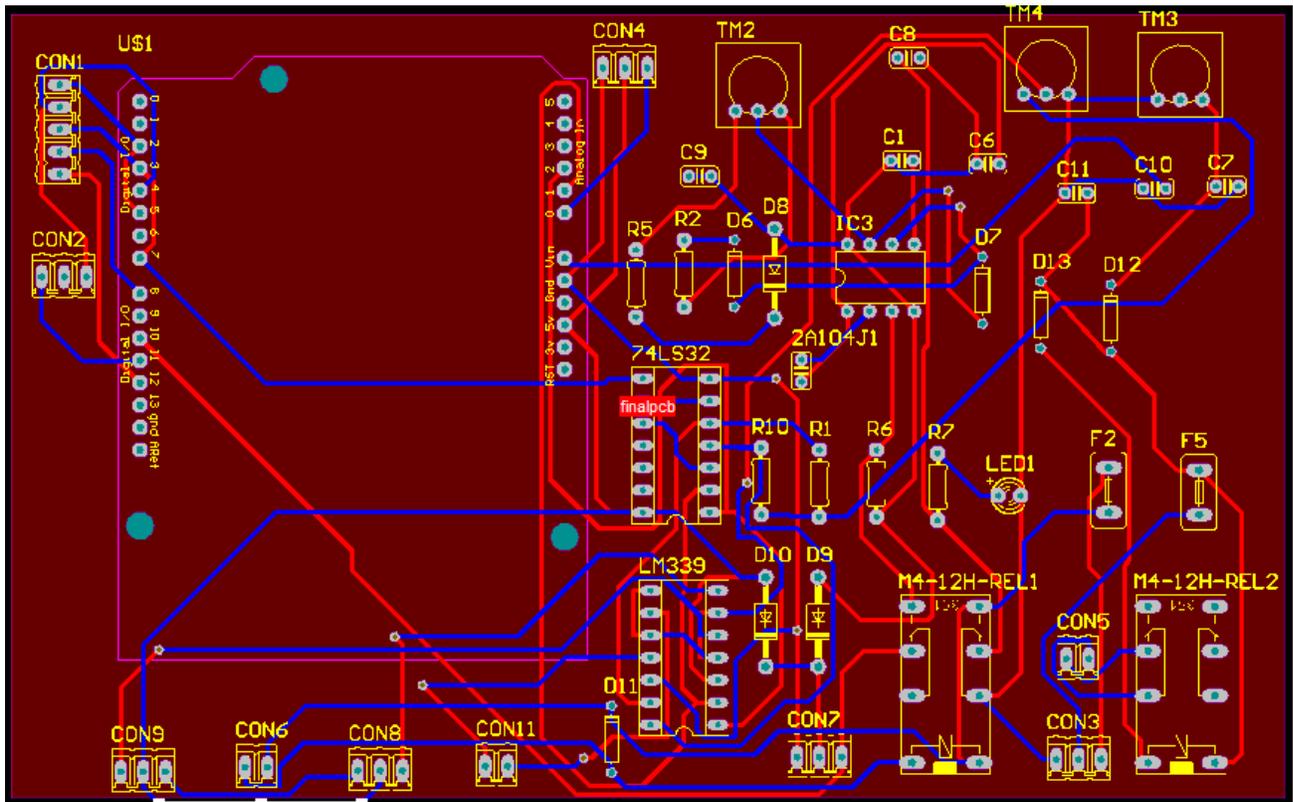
SAE Low – level control circuit, PCB layout using Altium Designer tool
